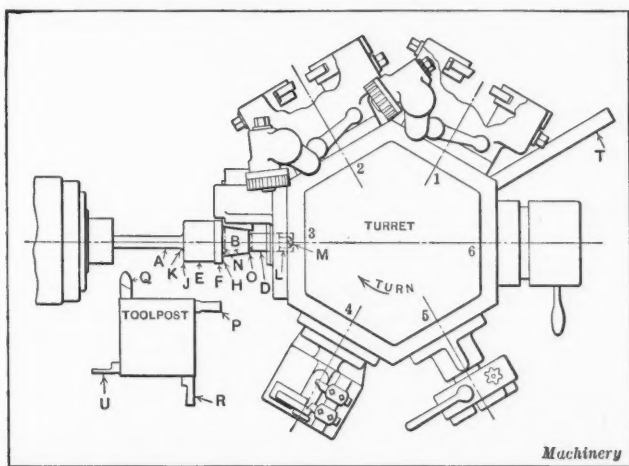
Tooling Lay-out for machining Part shown in Fig. 23
